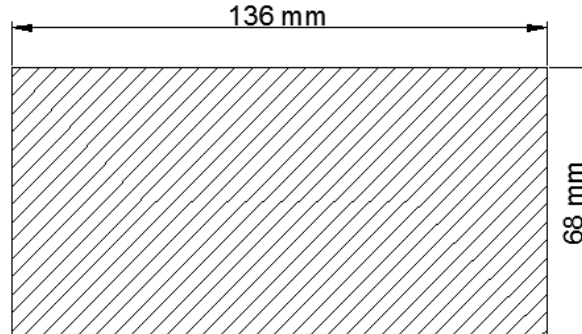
Panel cut out dimensions of TDS Blowdown Controller BK 5000T
